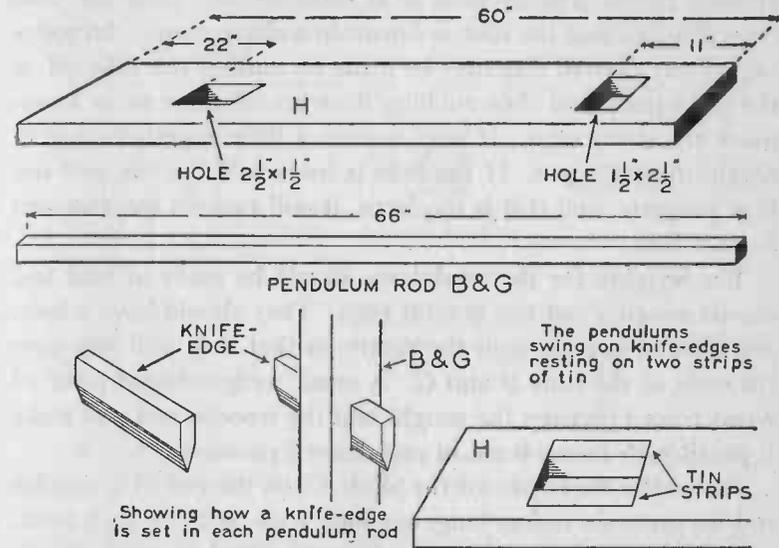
Details of the table, pendulum rod for the pen arm and the knife edges used on the harmonograph are shown above.
